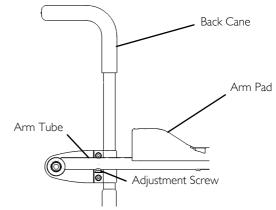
Adjusting the Angle of the Cantilever Arm
